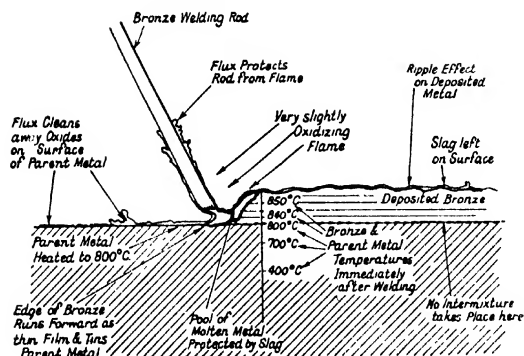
PICTURE DIAGRAM OF BRONZE WELDING PROCESS
